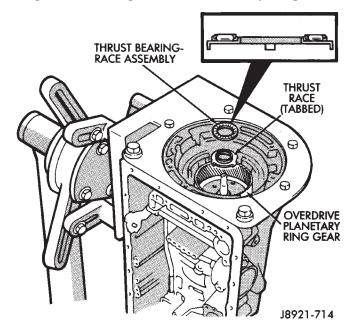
Installing Ring Gear Thrust Bearing And Race
